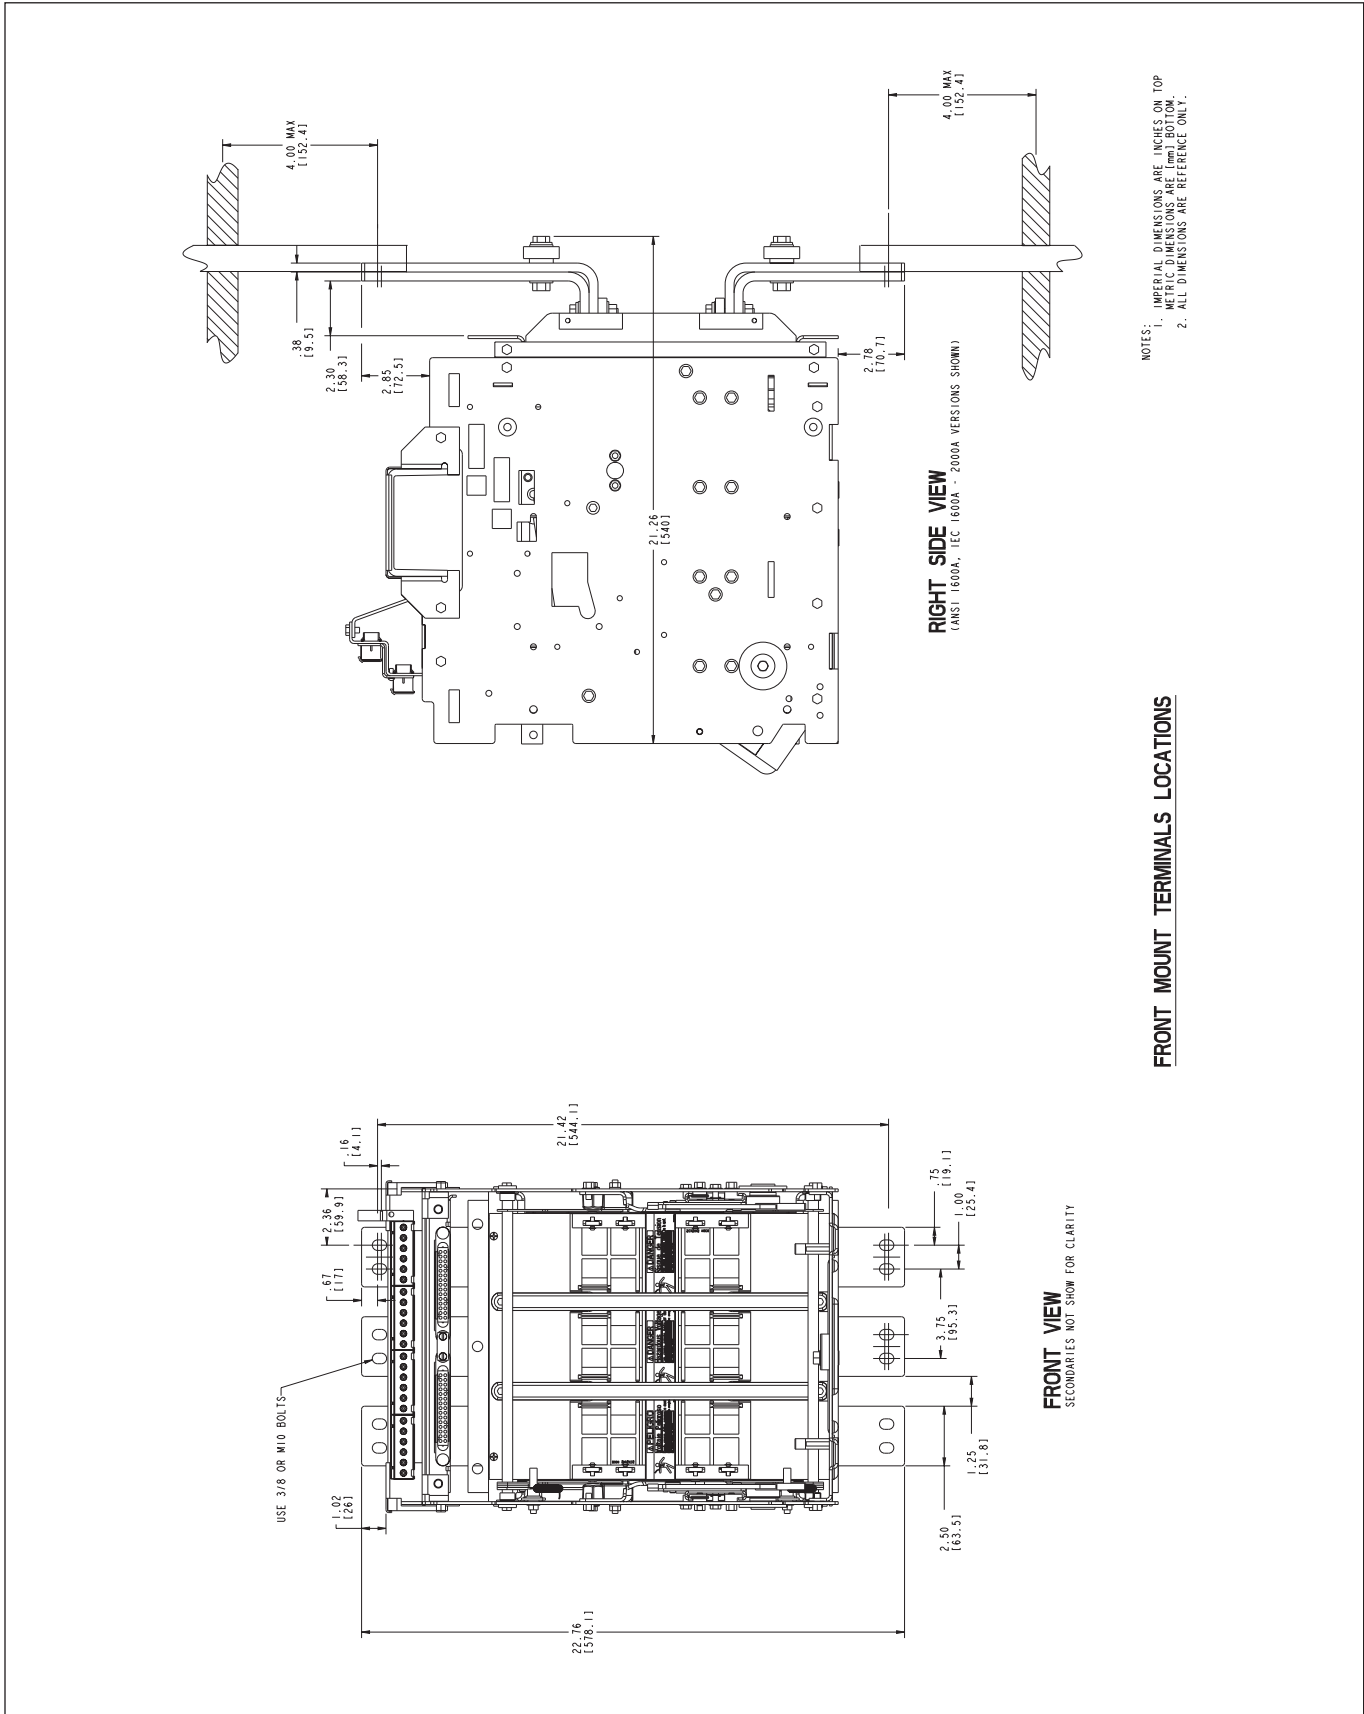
800-2000A Narrow frame fixed breaker (Overall dimensions and mounting locations)
